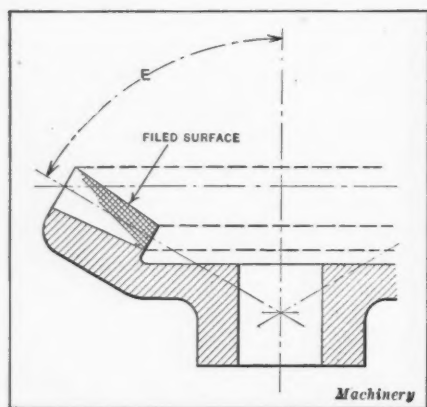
Filed Surface of Milled Internal Bevel Gear Teeth
